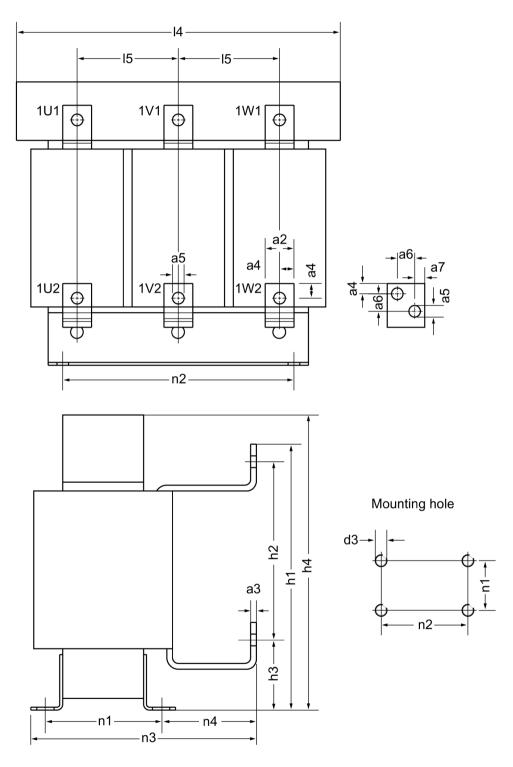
Dimension drawing of line reactors for Basic Line Modules
